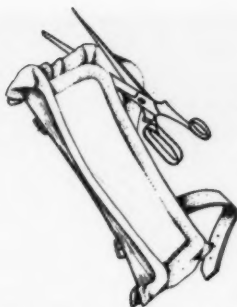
Final step in fabrication of cover for opening in side of socket.
